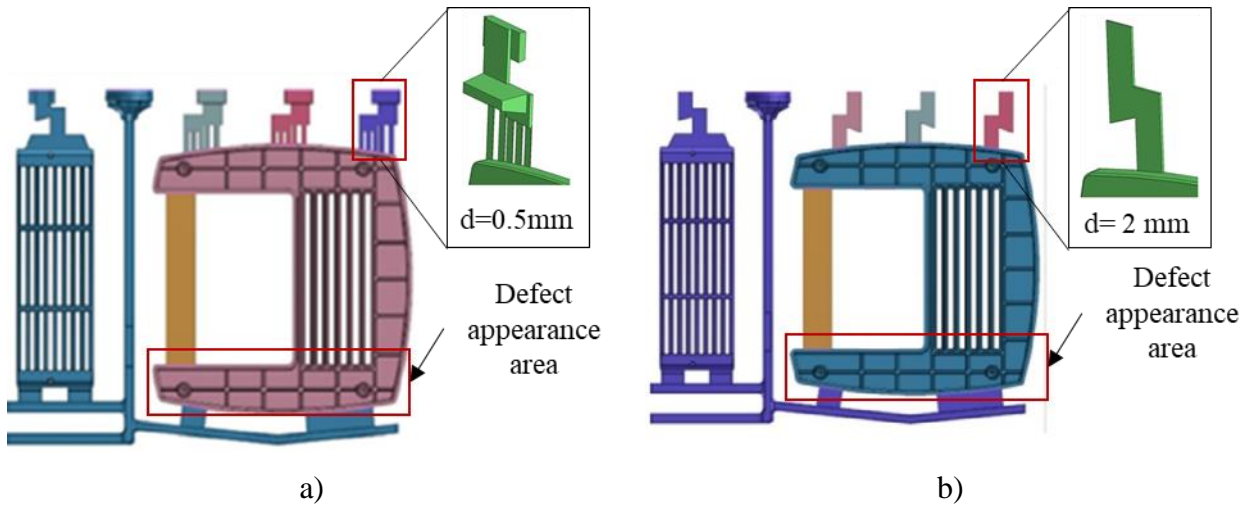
The fireplace door frame casting: a) Original casting geometry, b) Optimized casting geometry
